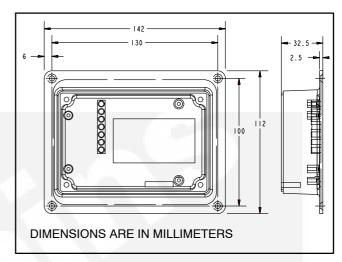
OPERATOR PANEL FOOTPRINT
